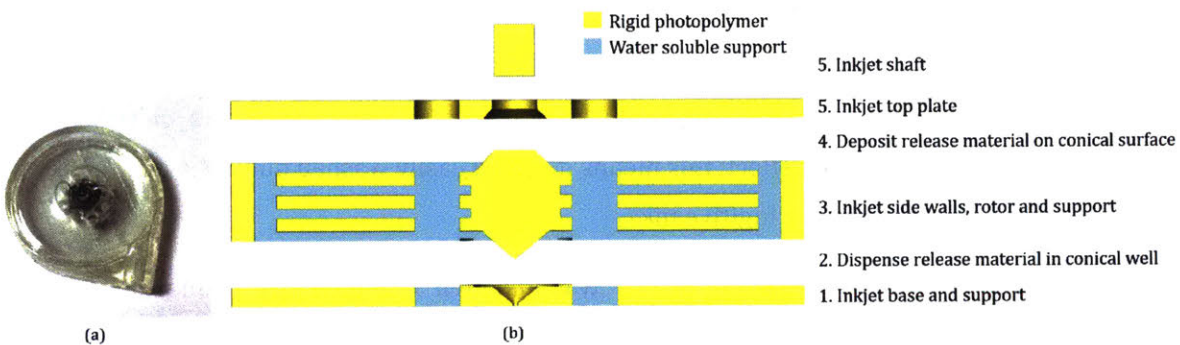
a) Photo of fully-printed Tesla turbine b) Cross-section of turbine showing printing steps. Diameter is 25mm.
